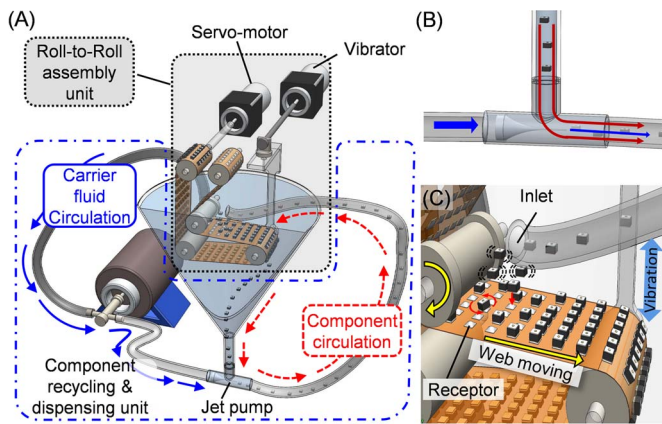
Automated Roll-to-Roll fluidic self-assembly process. (A) Overview illustrating component dispensing, fluidic self-assembly based on surface tension, and recycling of excess components. (B) Principle of jet pump. (C) Illustration of surface-tension driven self-assembly using molten-solder-based-receptor.
